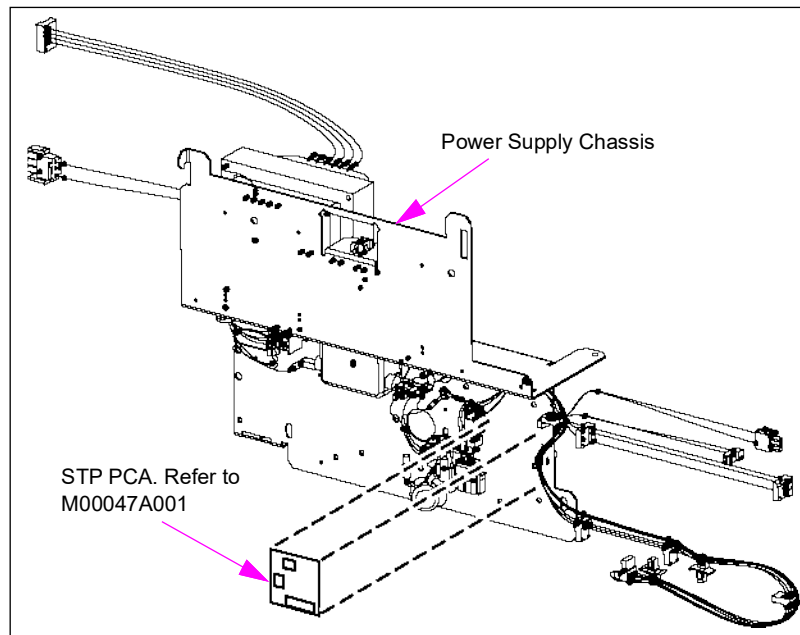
Universal Power Supply (Rear) - STP Board LocationBoard Connections and Cables
